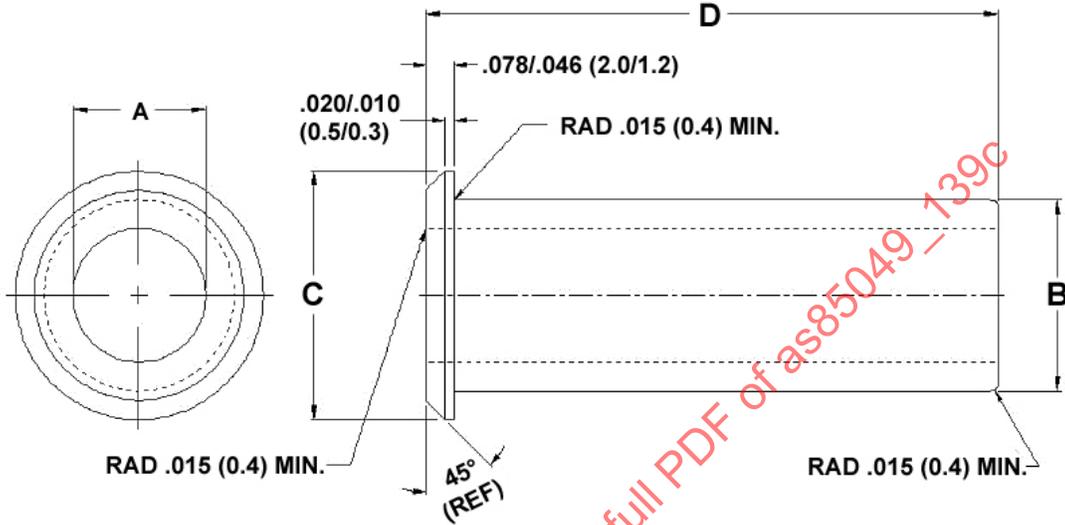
BUSHING CONFIGURATION AND DIMENSIONS (WITH FLANGE)
